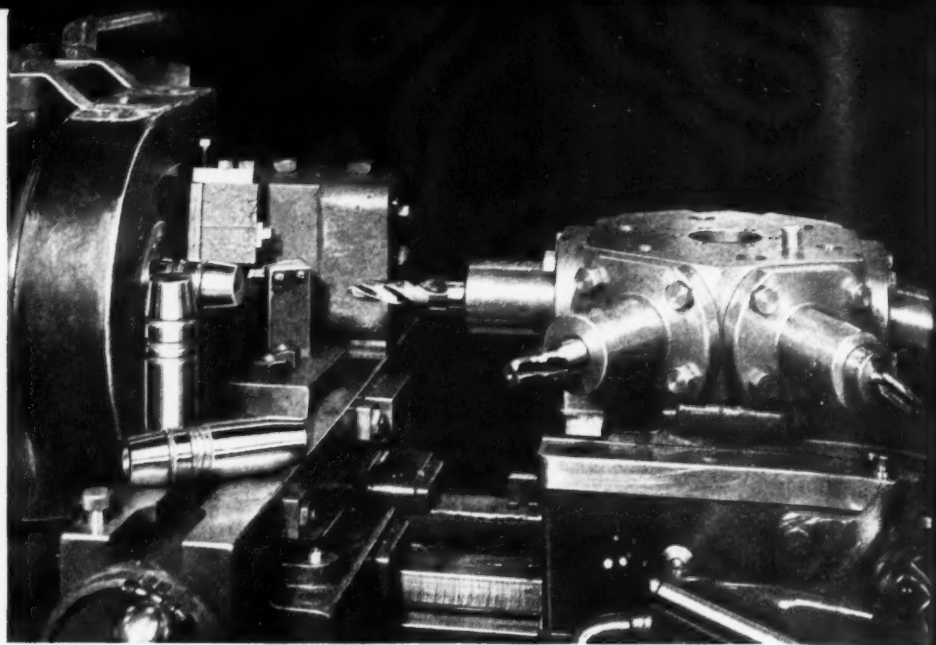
One of a Battery of Turret Lathes Employed for Machining the Tracer-hole End in 40-millimeter Shells
